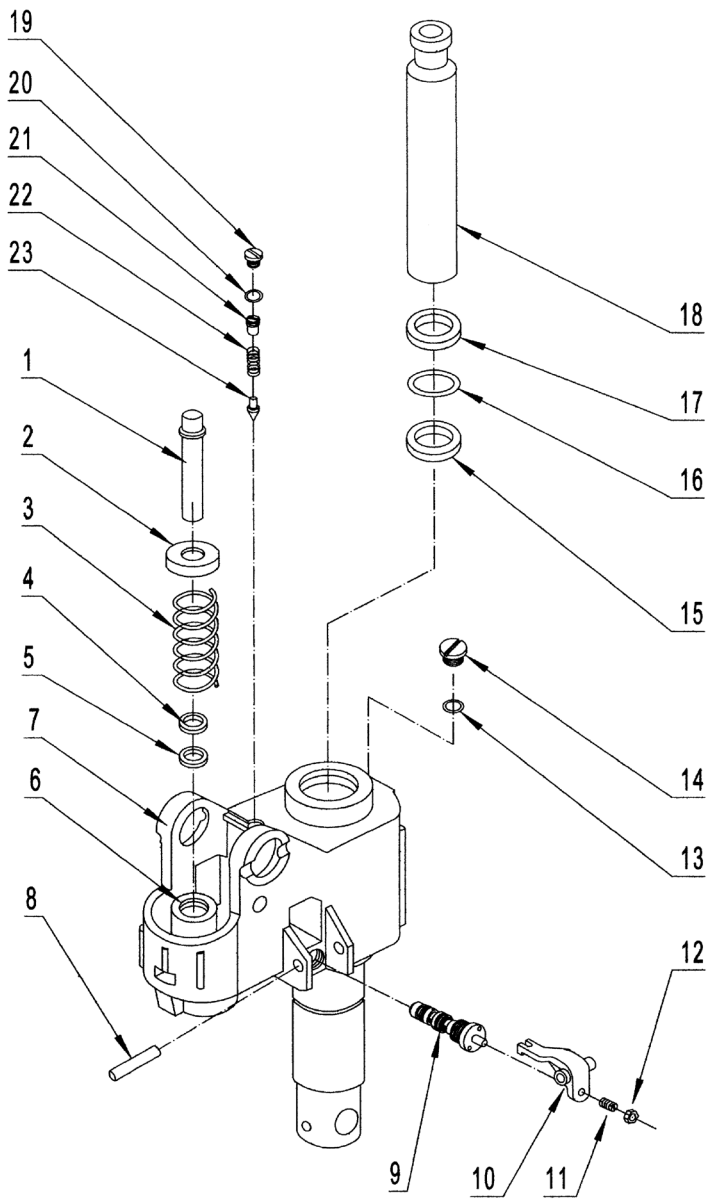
Repair Parts Illustration for Pallet Truck Pump Assembly
